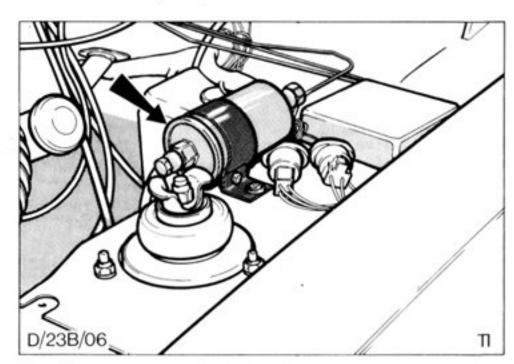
Location of fuel filter assembly on the left hand inner fender panel.
